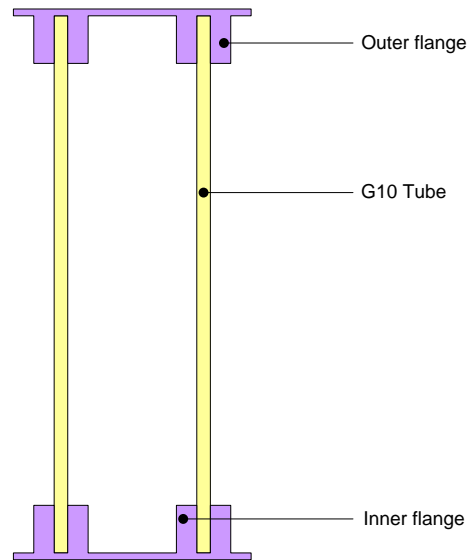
Option 1 for the tube-flange attachment (cross section of tube/flange shown).
